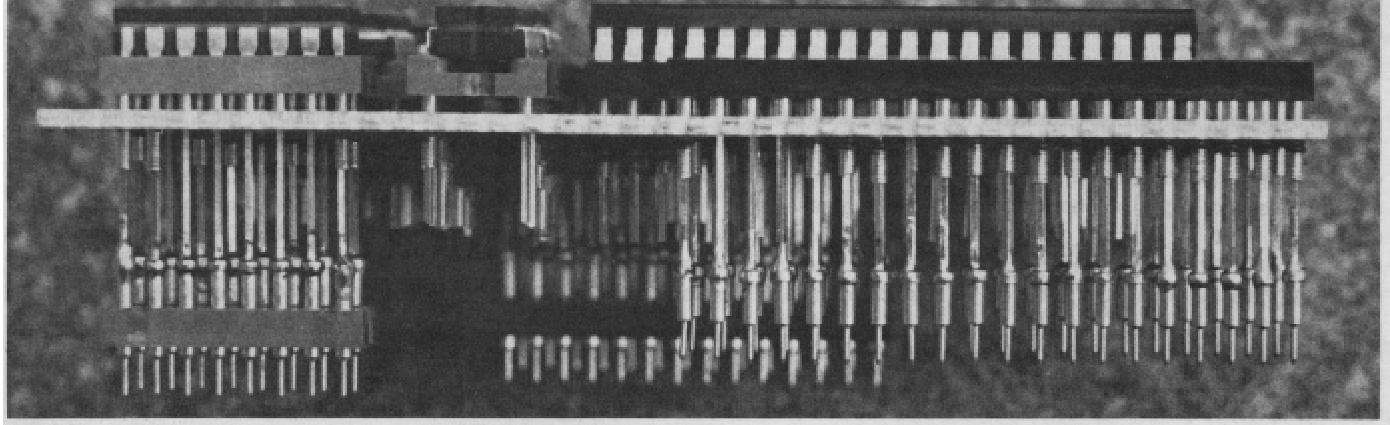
Side view of adapter board shows the frameless socket pins attached to the ends of the wire-wrap pins, using an ordinary
